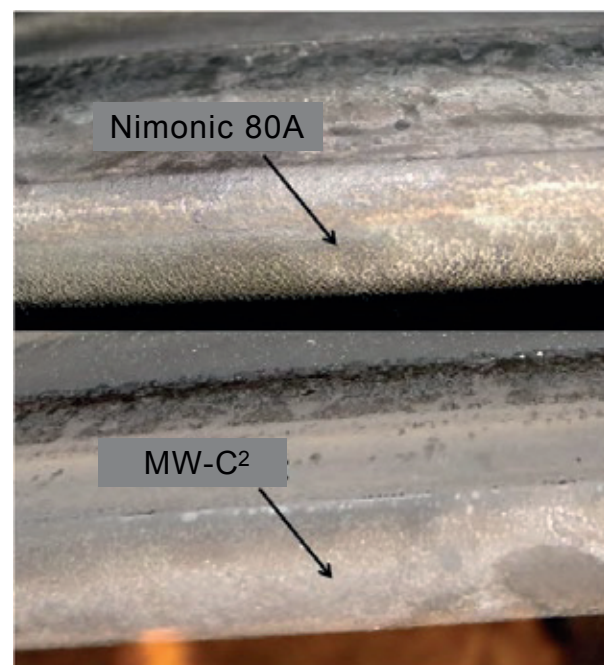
Close-up photographs of the 50MC valve spindles, illustrating the
